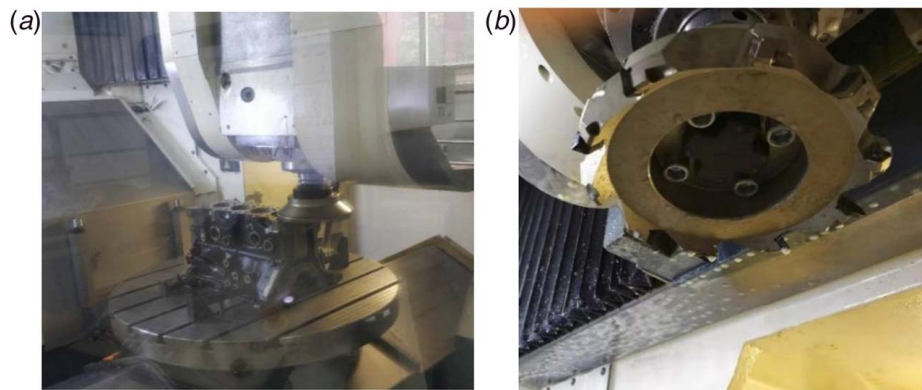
Experimental setup for face milling: (a) fixturing in the CNC machining center and (b) the disc milling cutter utilized in experiments
